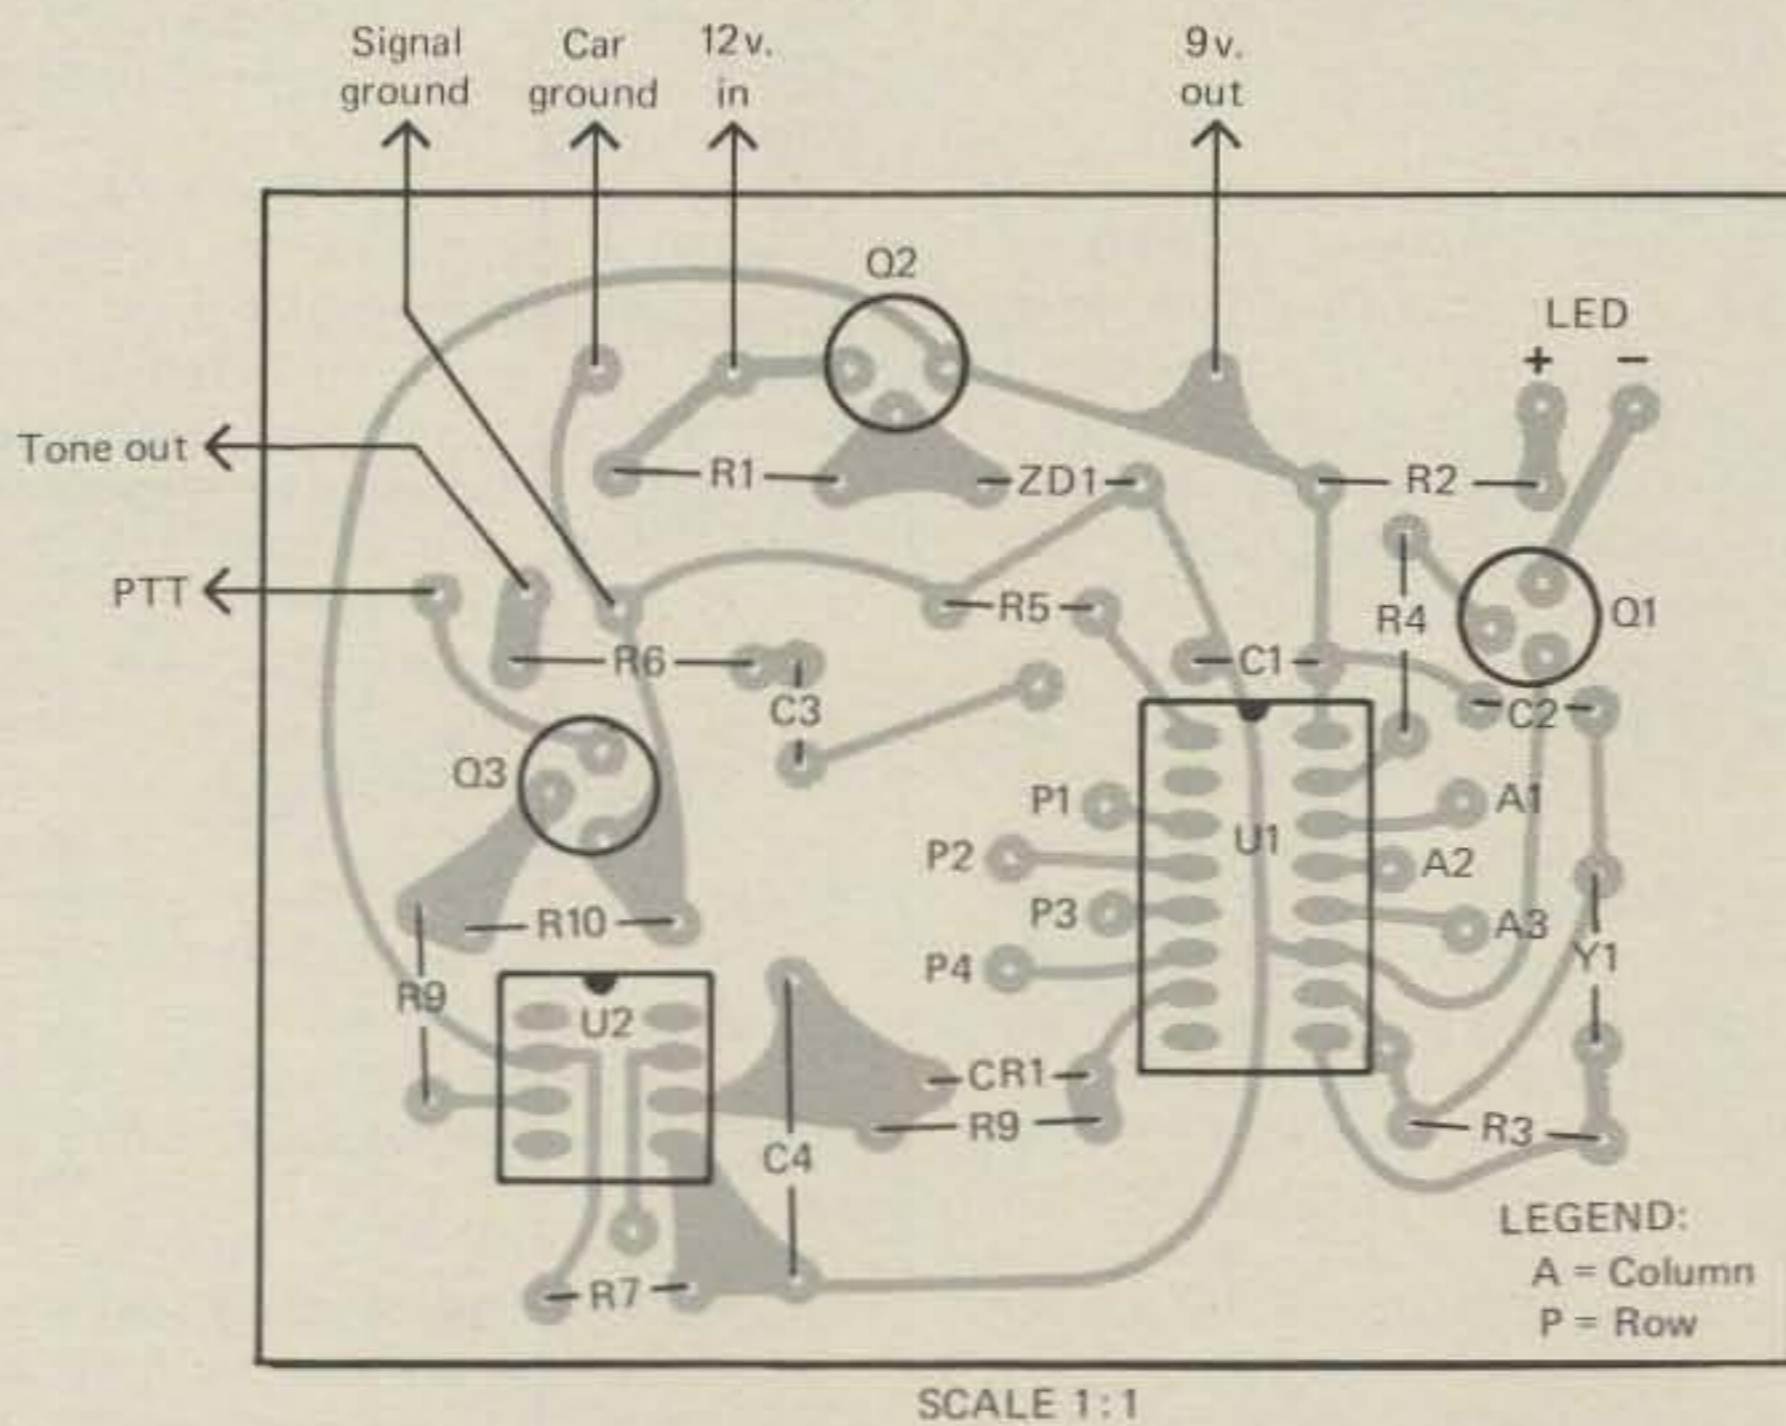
A full-size printed circuit board mask and the parts placement for the autopatch.
